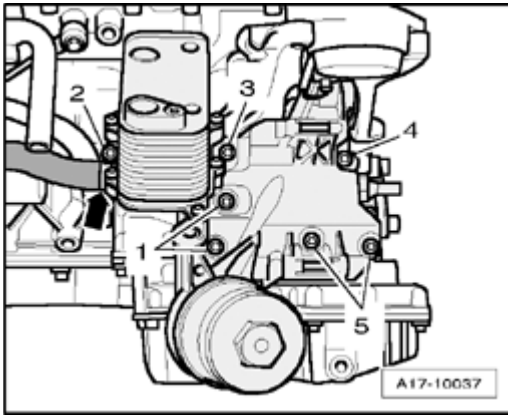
Oil Filter Housing Coolant Hose & Bolts
